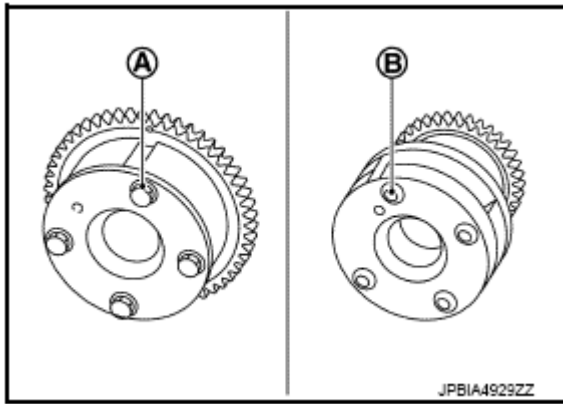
Identifying Camshaft Sprocket Assembly Bolts (Do Not Loosen)
